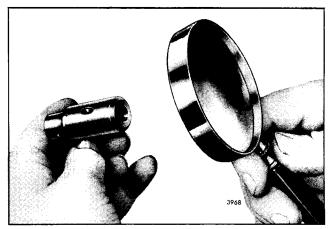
Examining Sealing Surface with a Magnifying Glass
